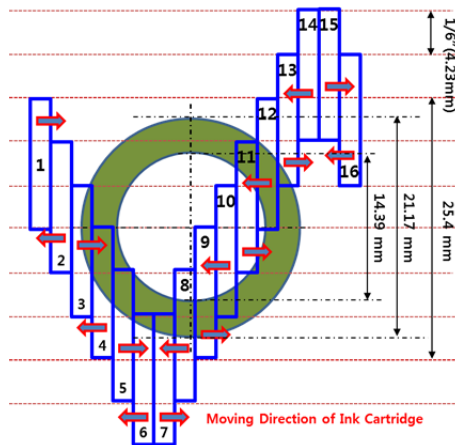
Printing Paths for Hollow Wall Cylindrical Cross Section
